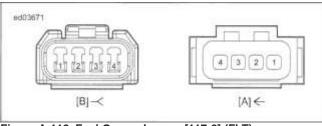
Fuel Gauge Jumper [117-2] (FLT)
